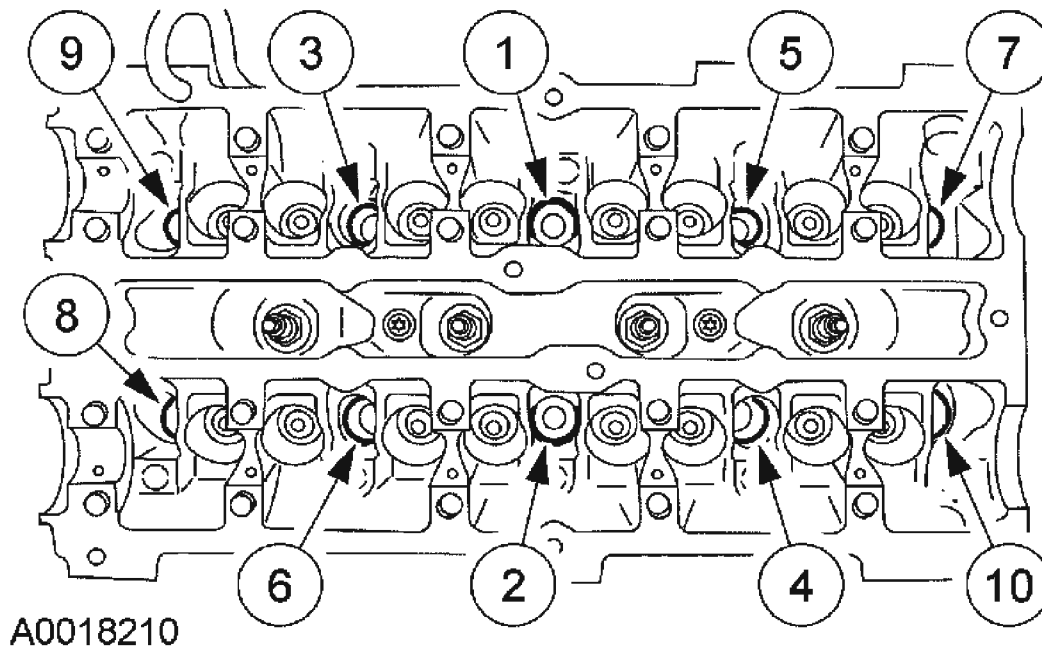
Loosening Camshaft Bearing Bolts In Sequence
